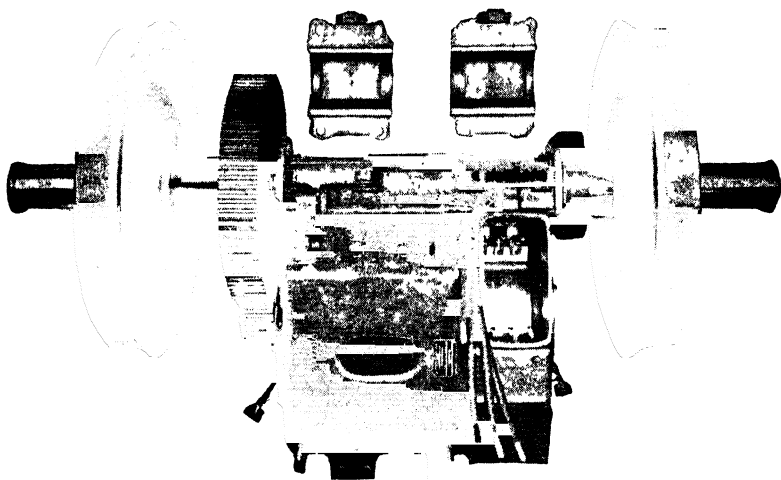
G-E Direct-Current Traction Motor, Type GHM-838-D1, Mounted on Axle with Bearing Cap Removed
